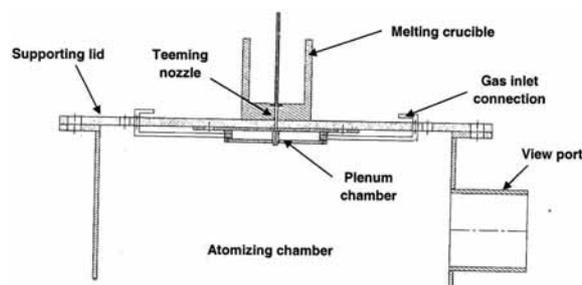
Schematic view of assembly consisting of melting crucible, supporting lid and plenum chamber.
